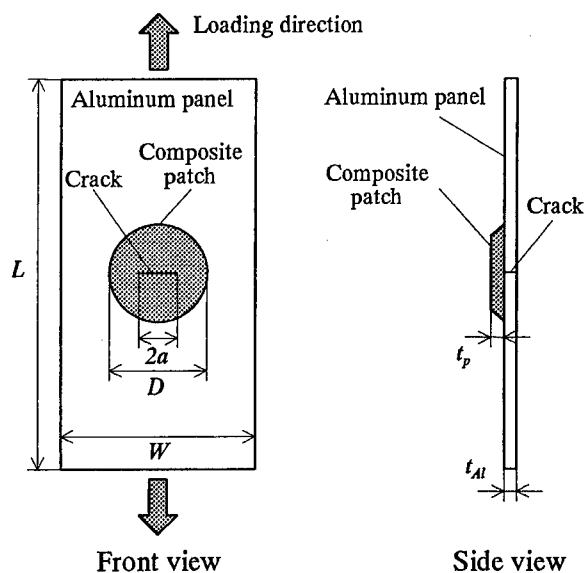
Cracked aluminum panel repaired with a single-sided composite patch
